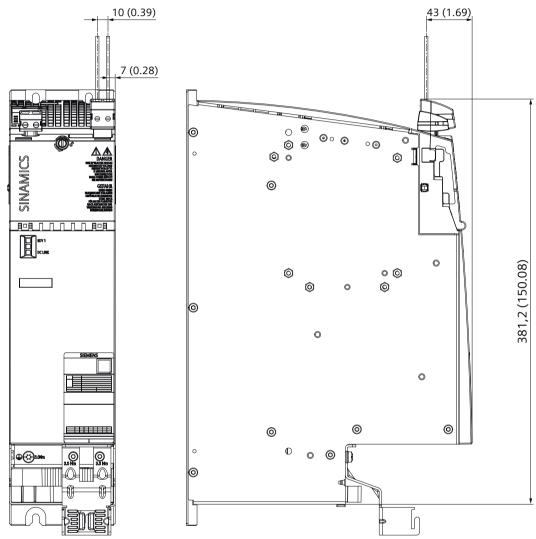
Dimension drawing of a 100 mm wide component (Motor Module) with 43 A DC link adapter, all dimensions in mm and (inch)
